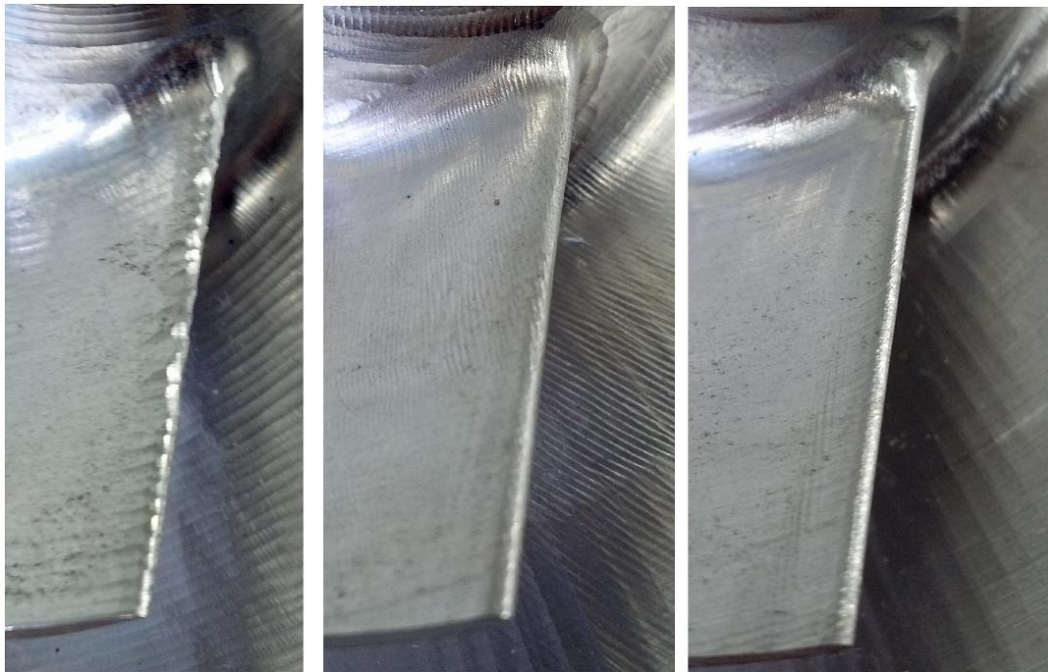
Improvements made to the surface finish by using a more rigid cutting tool.
